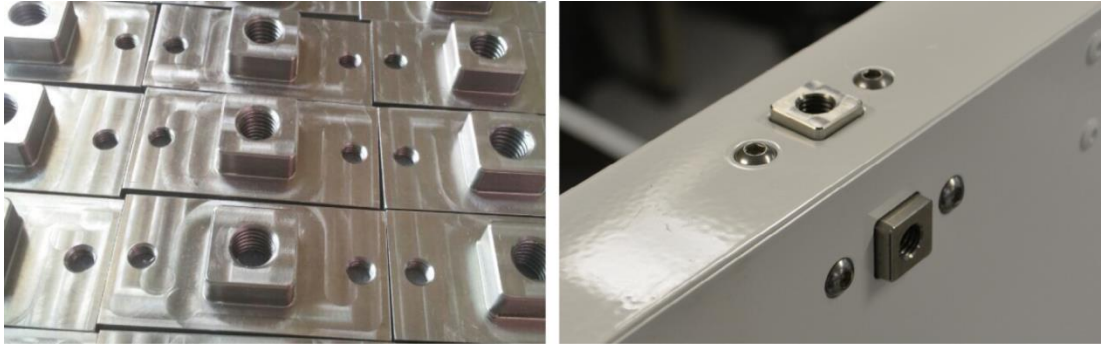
Hardpoints were machined in stainless steel and attached internally to the aluminium cross spans.
